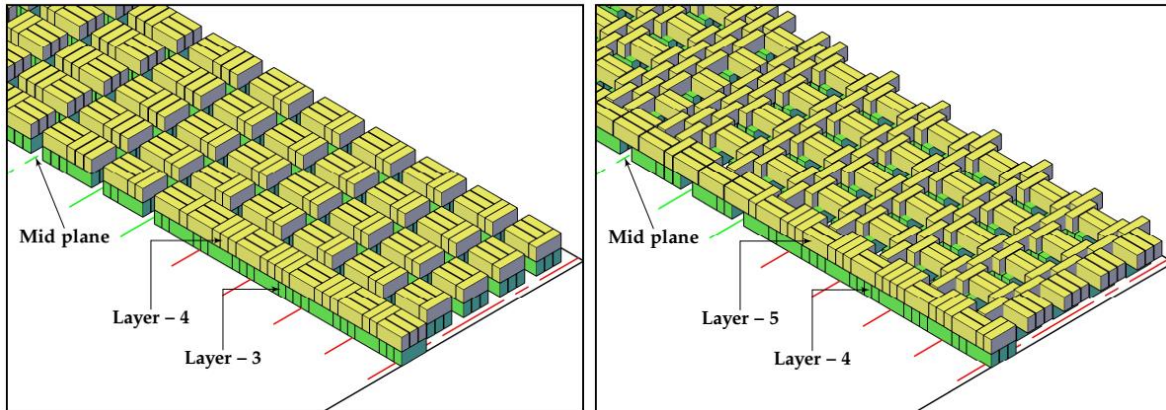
Brick-setting showing *Jodi* and *Bandhan* in a Zig-zag kiln
